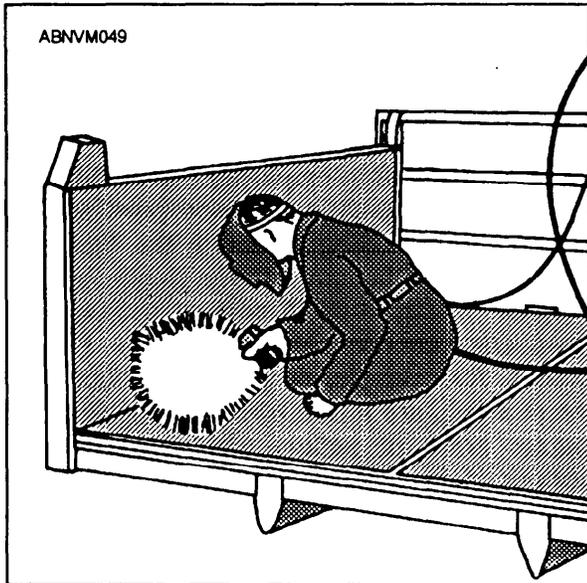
GMA welding aluminum truck bed.
